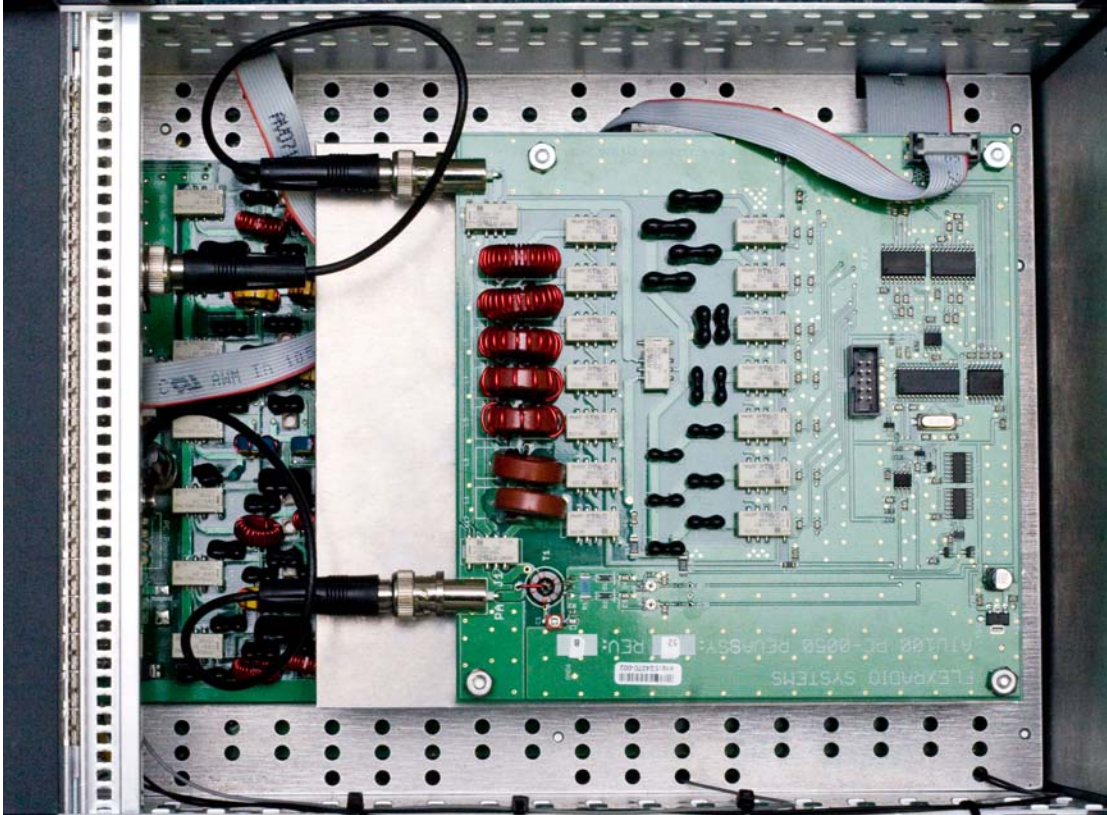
Flat washer and internal tooth lock washers on top of RF shield
